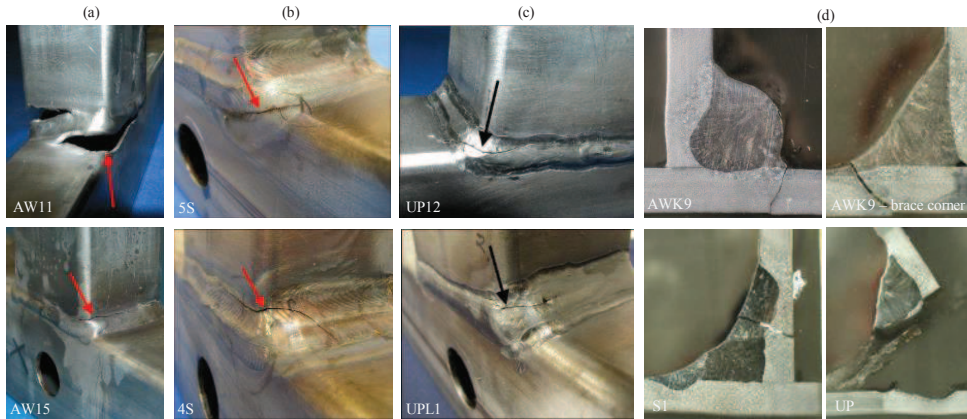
Failure modes of the test specimens: (a) AW and (b) TIG-dressed specimens with failures at the weld toe of brace member (AW11, 5S) and at the weld toe of chord member (AW15, 4S), and weld root failures in the HFMI-treated specimens (UP12, UPL1), (d) macro sections of failed specimens.
